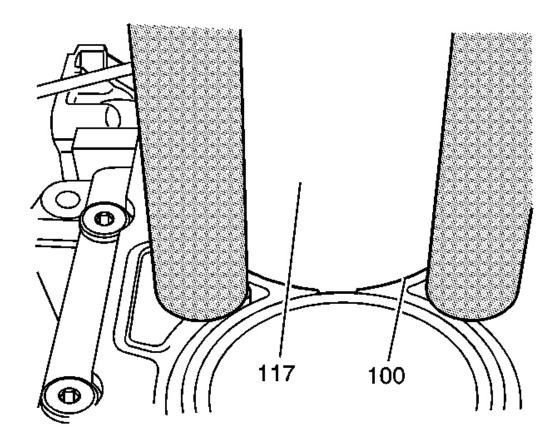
View Of Proper Liner Alignment Courtesy of GENERAL MOTORS CORP.
